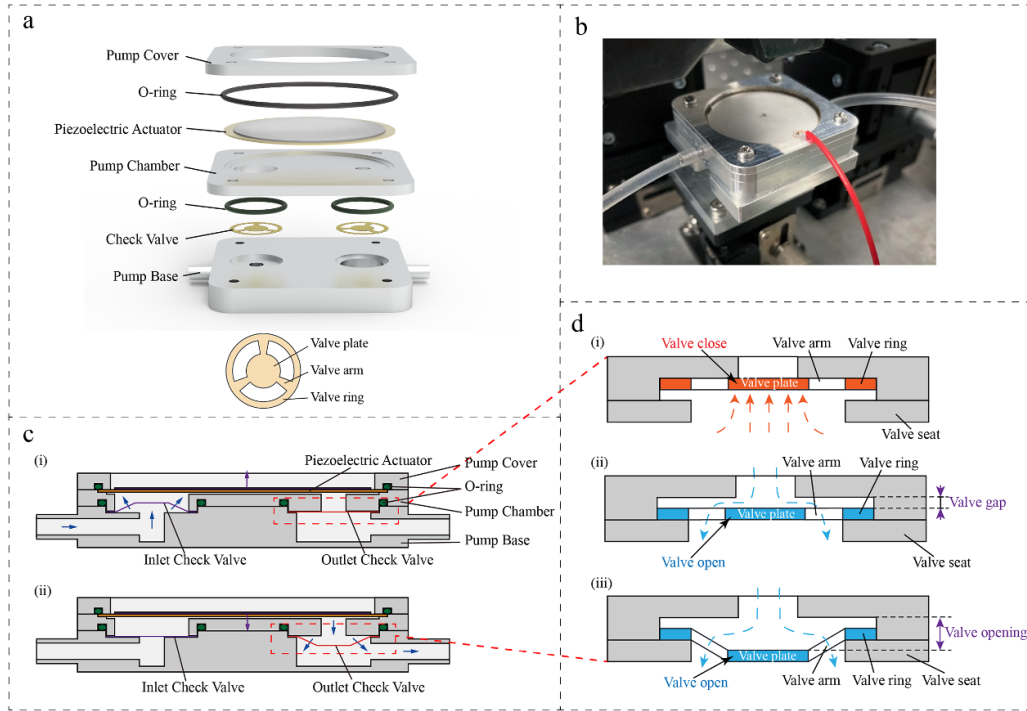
(a) Exploded view of the structure, (b) picture of the assembled pump, (c) schematic view of the pumping process, (d) schematic view of the unfixed valve.
